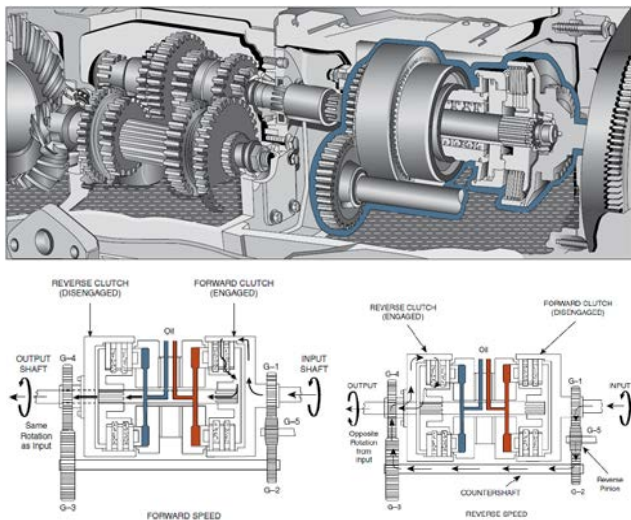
Forward/reverse auxiliary gearbox with two multi-plate couplings [3]
